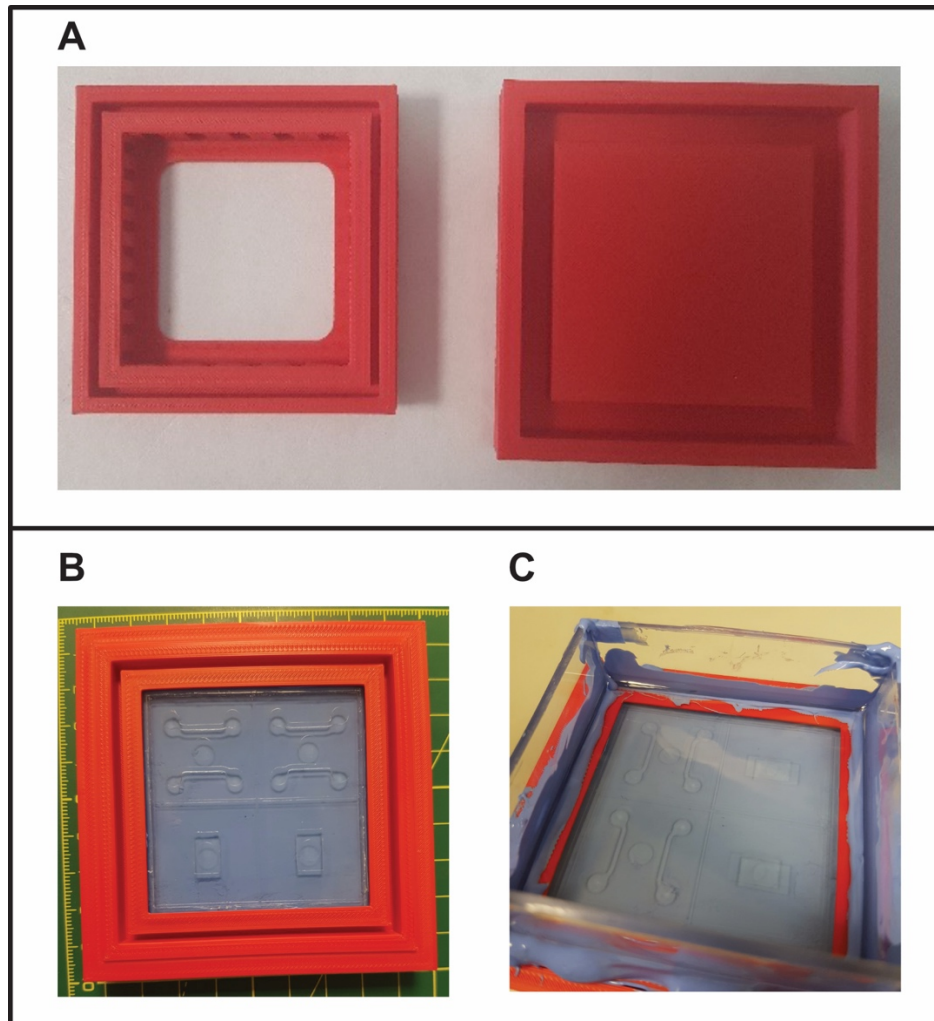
Assembly cassette to facilitate LOC device manufacturing. A) 3D printed cassette before fitting the mould. B) Assembled mould in the cassette. C) Assembled mould within the cassette and surrounded by polyvinyl chloride (PVC) walls bounds with silicone.
